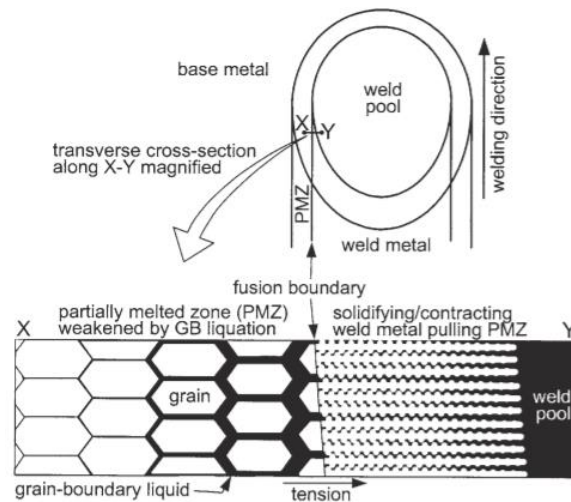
Mechanism of liquation cracking in the partially melted zone of an aluminium weld [109]
